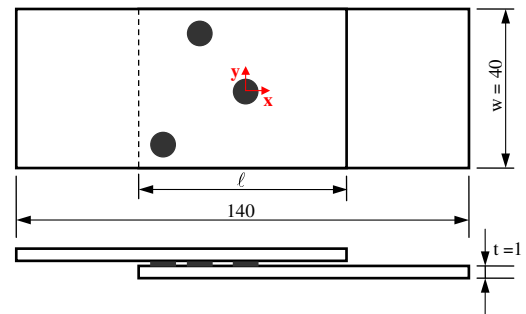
Geometry of the joint with three spot welds (top and side views).
